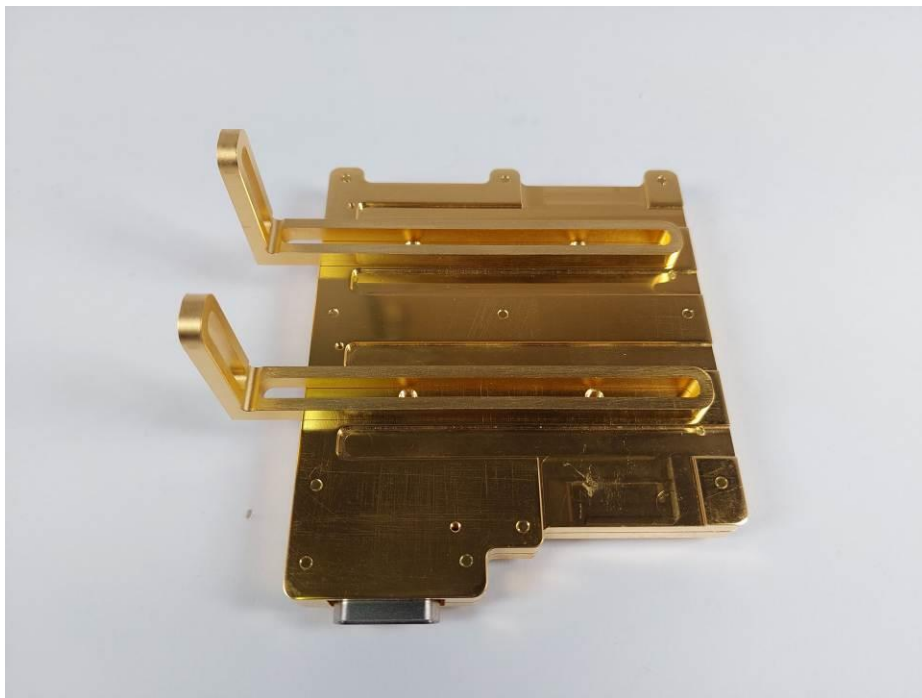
Two mounting brackets 35x100 installed (Aivon product number 500301)
